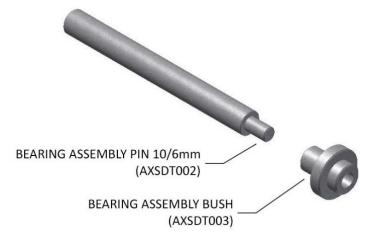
Fit Bearings using Special Tools AXSDT002 and ASXDT003
